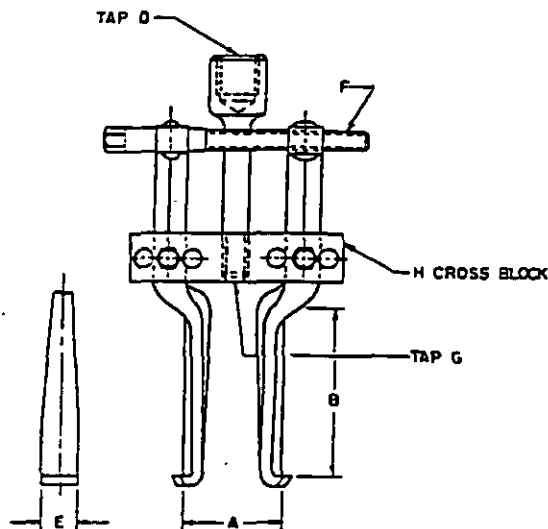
Type XI, puller attachment, mechanical, bearing, internal.
